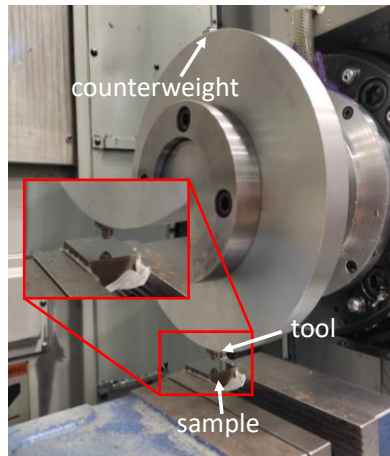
Experimental setup with an enlarged view of the tool and sample
